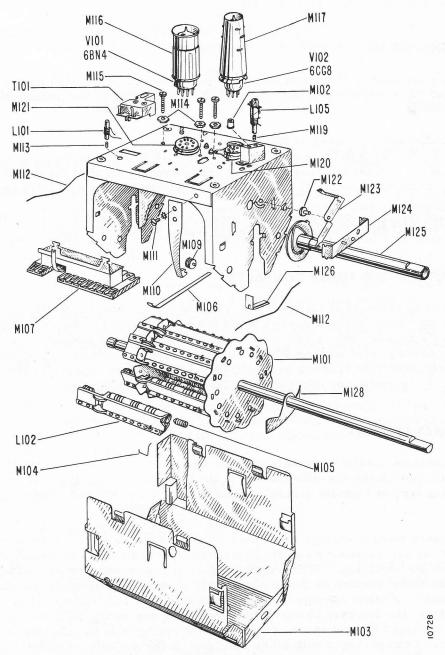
Exploded View of VHF Tuners 94D131-1 and 94D131-2.
